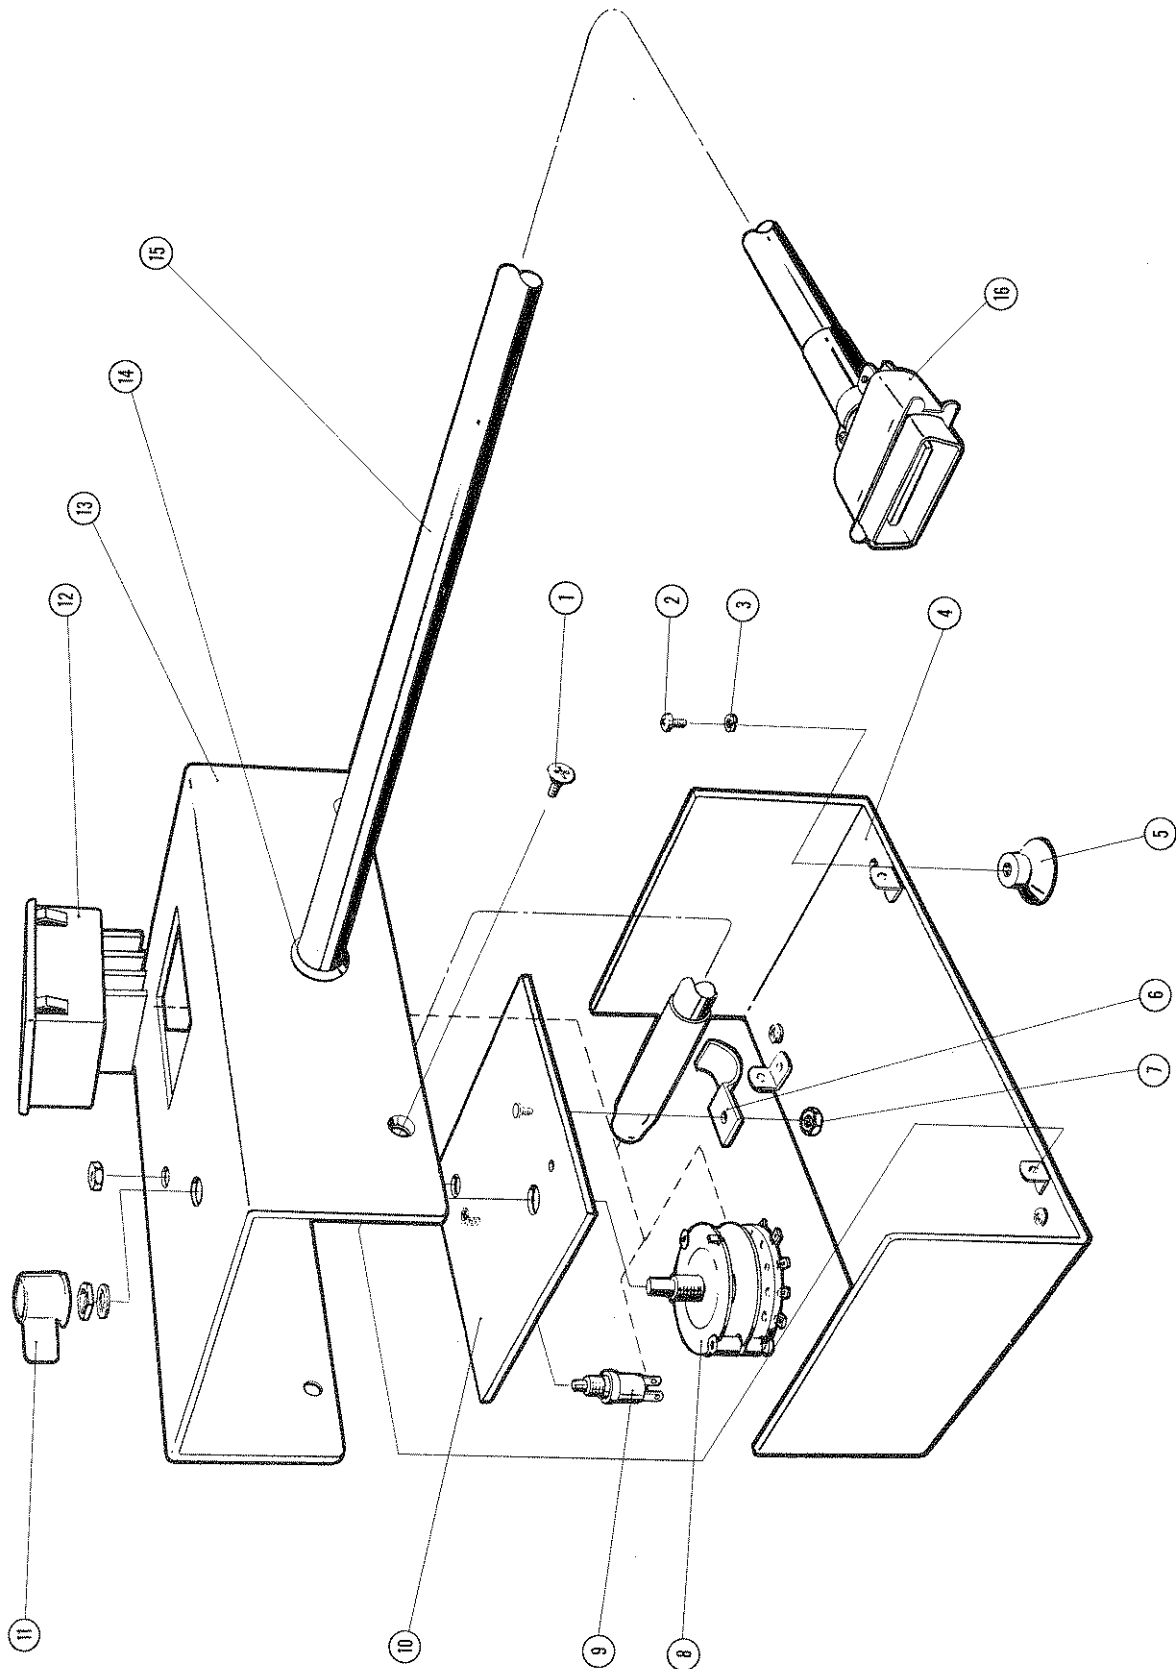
Parts Identification for 16023B (Sheet 1 of 2).
